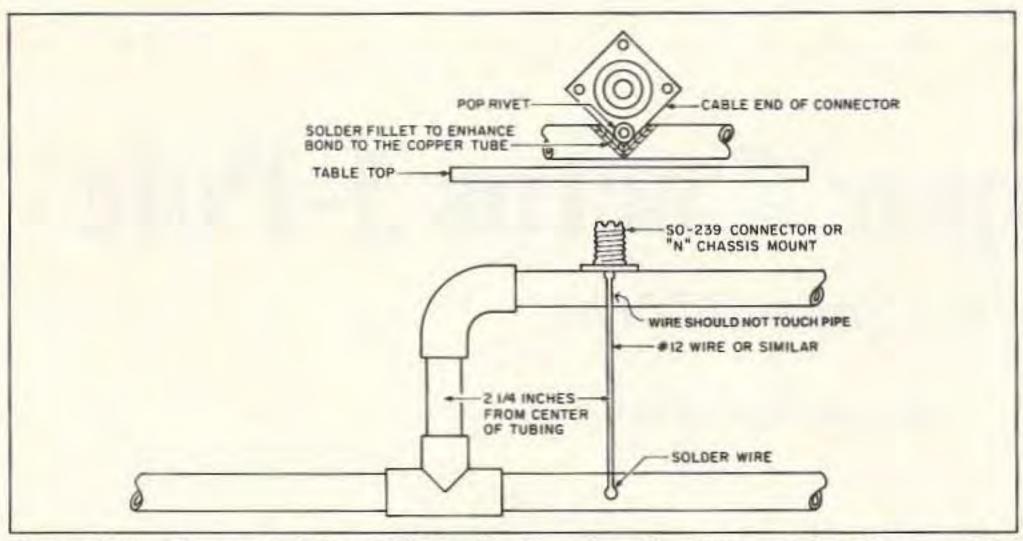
See the materials list. Before soldering, clean the joints and place the assembled antenna on a flat, noninflammable surface. Practice on some scraps of tubing and extra pipe joints if you're new to this. All dimensions are center-to-center.
